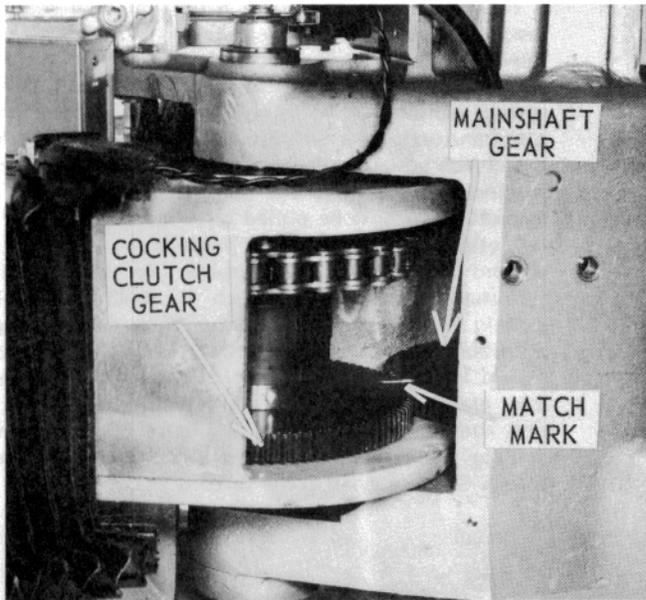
Match Mark on Cocking Clutch Gear and Mainshaft Gear
